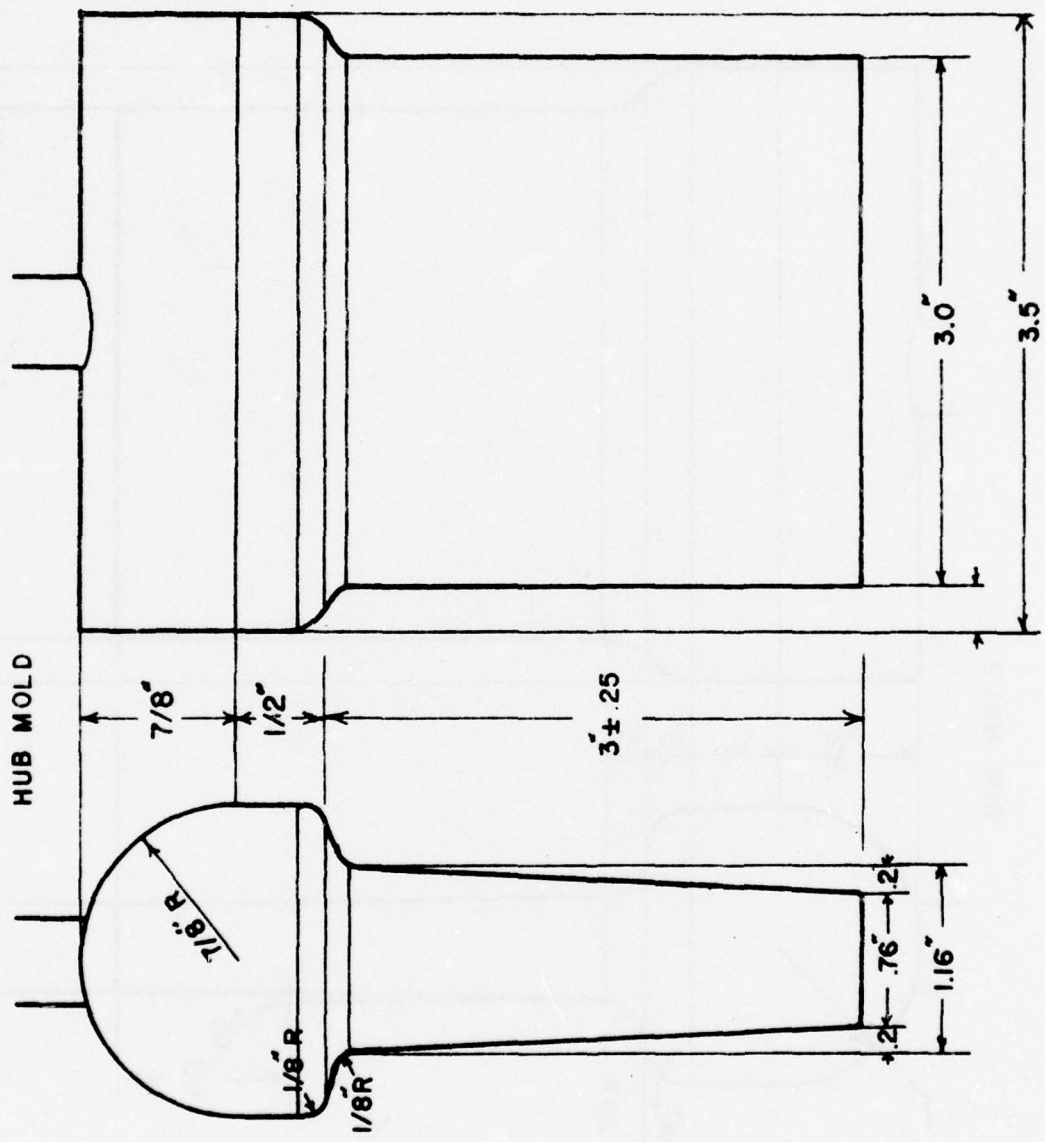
Casting used to simulate hub section of T-63 rotor.
